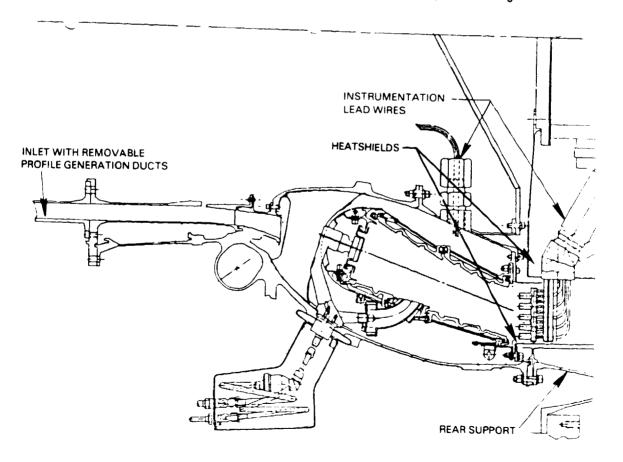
Test Section of Full Acquiar Combustor Component Rig
